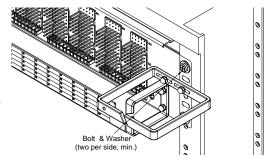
Rack-Mounting the DS1 Cross-Aisle Panel
